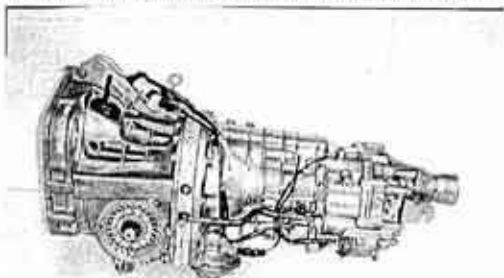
Gearbox casing and clutch bell housing 1
